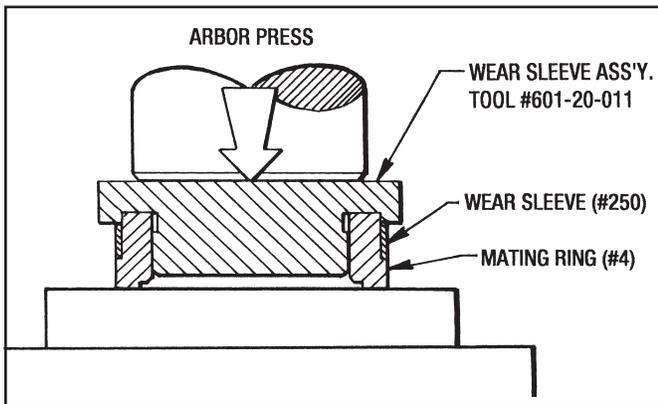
(Step 2) Installing Wear Sleeve (#250) on Mating Ring (#4) for #20 Posidyne
